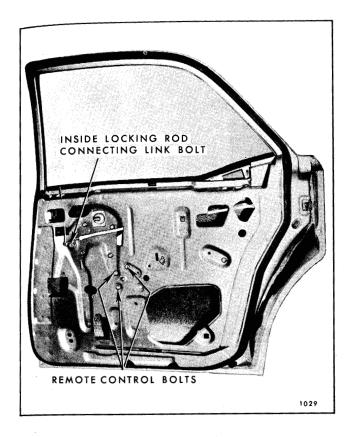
Door Lock Remote Control - "B" Style Shown - Other Similar
